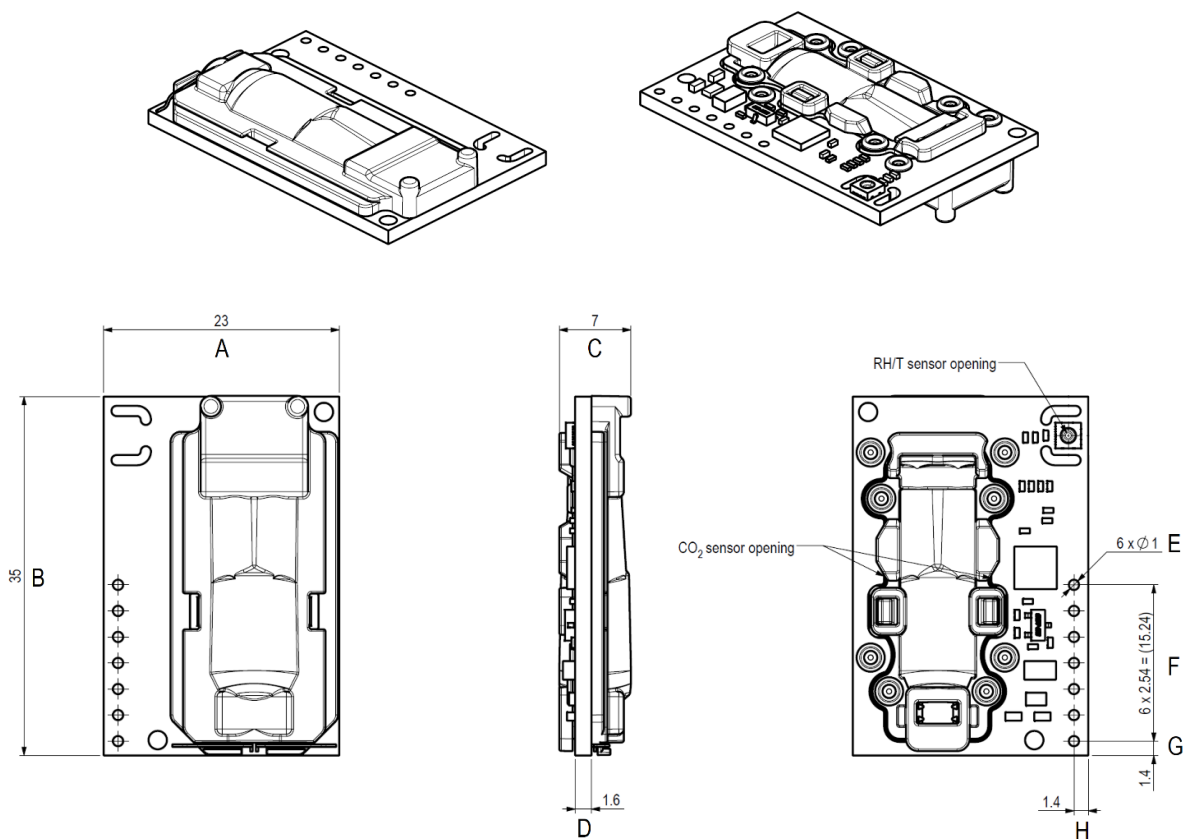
Product outline drawing of SCD30. Pictures on the left show top-view, pictures on the right bottom-view.
